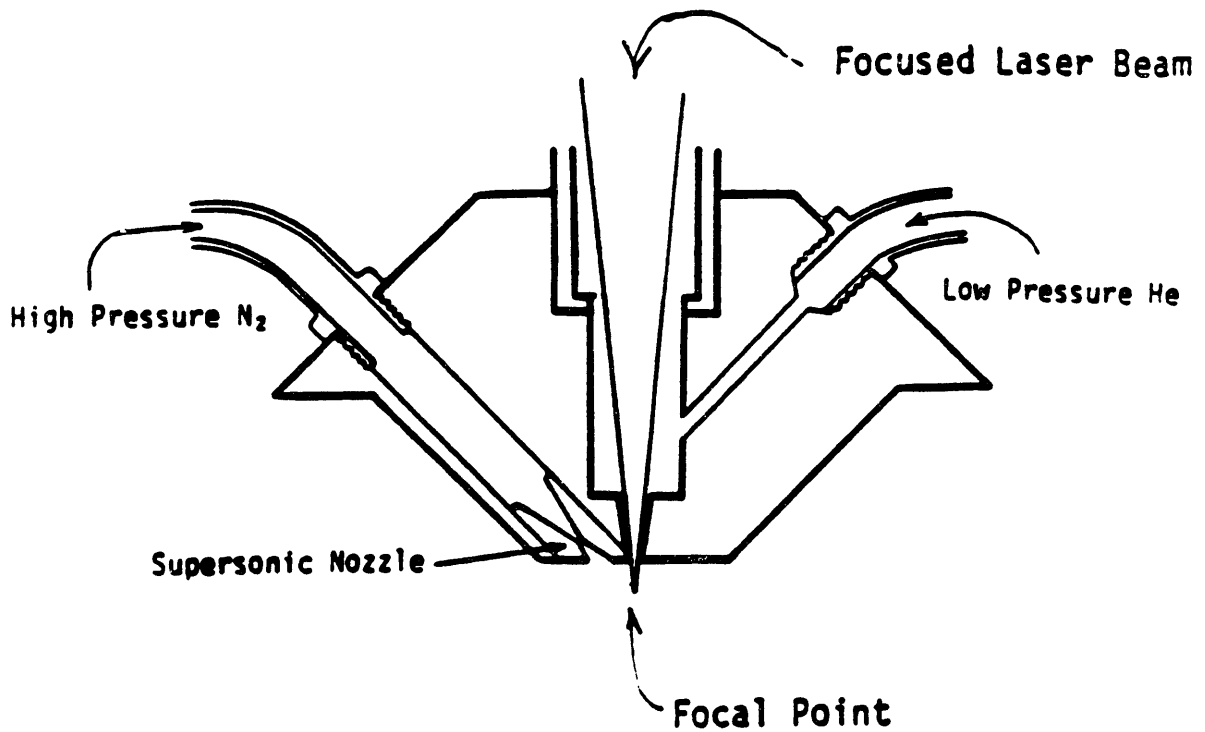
Diagram of first prototype laser cutting head for blind cutting.
